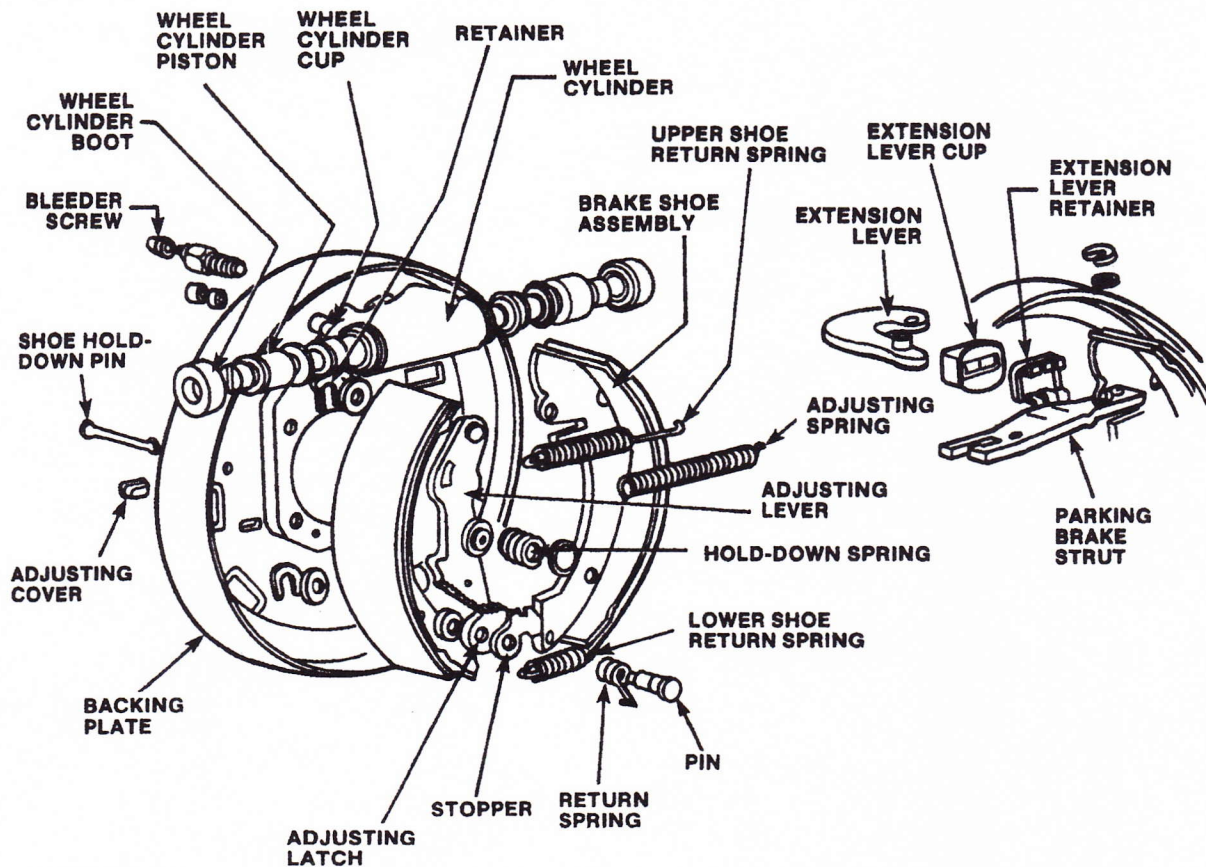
Components of a typical rear-wheel drum brake.
